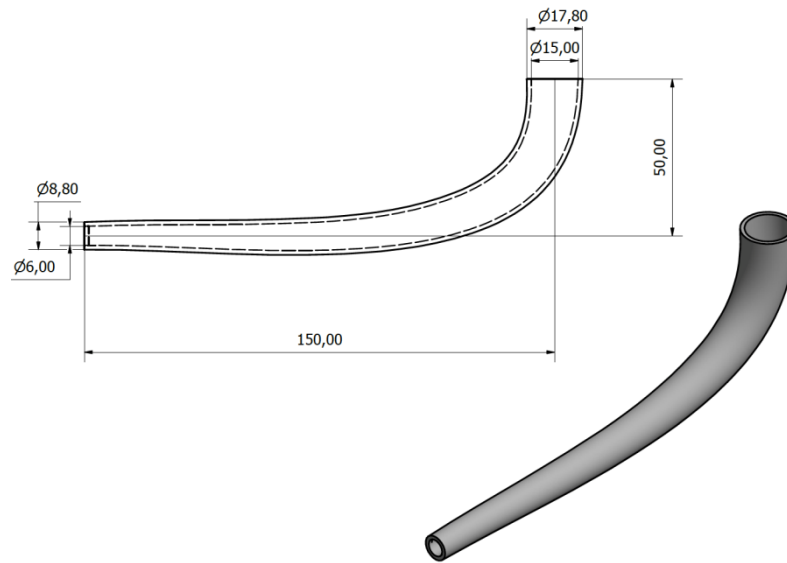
The mechanical drawing of ureter for 3D Printer
